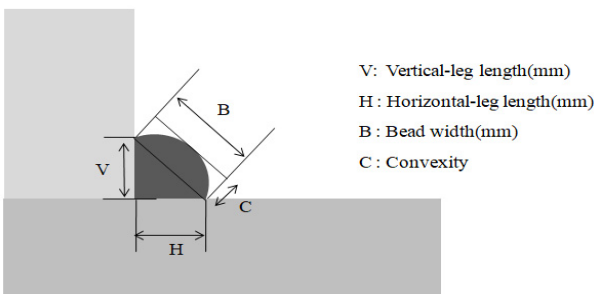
A schematic diagram of bead geometry for fillet welding
